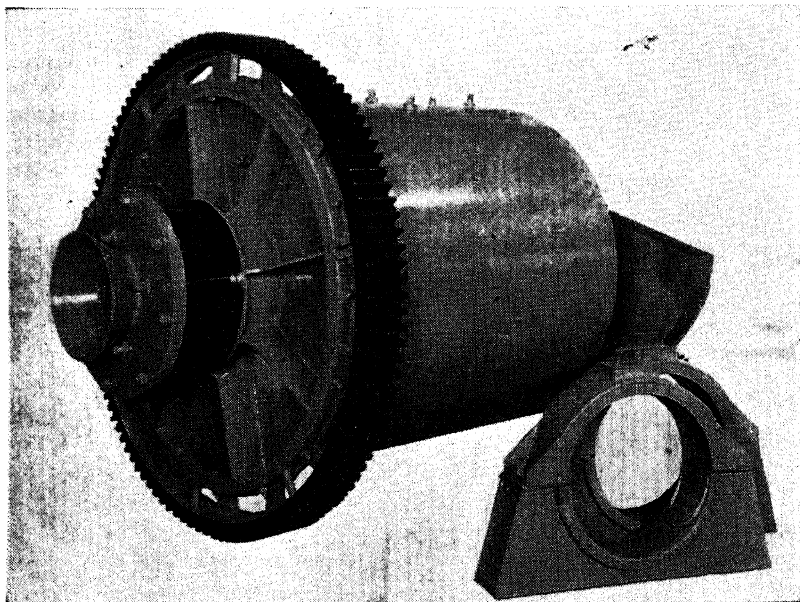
Ball mill of welded steel construction. Eliminates breakages formerly encountered with castings, and minimizes weight and operating cost.
